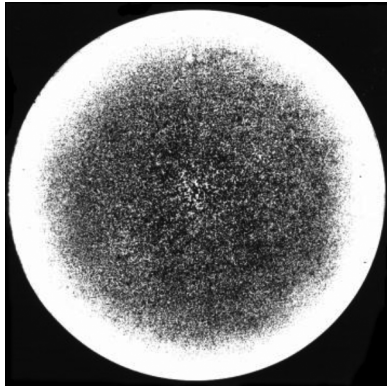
Macrostructure of gray cast iron rolling mill with a working layer with cementite on the surface and carbides in the axial zone during cooling in an iron mold of $\varnothing 431$ mm
